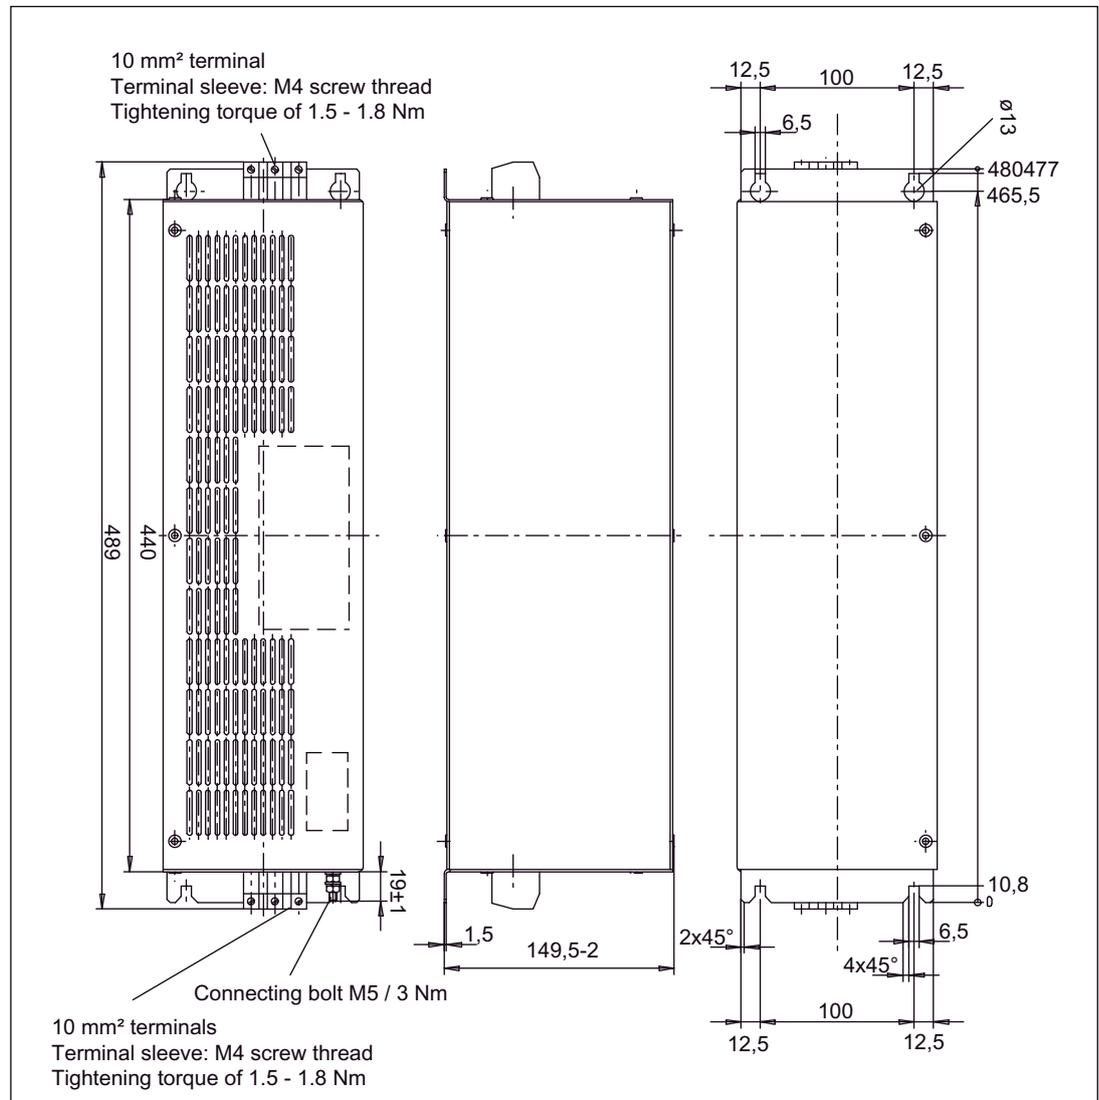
Dimension drawing: 16 kW Wideband Line Filter for Active Line Modules
